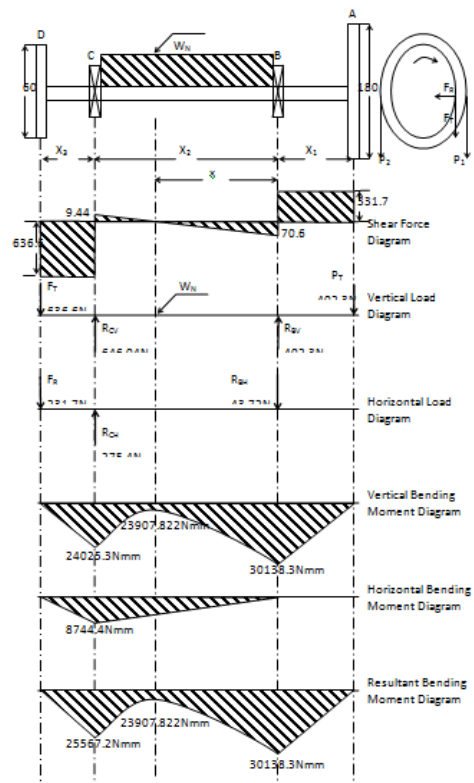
Sketch of load, stress and bending moment of pelletizer driving shaft
